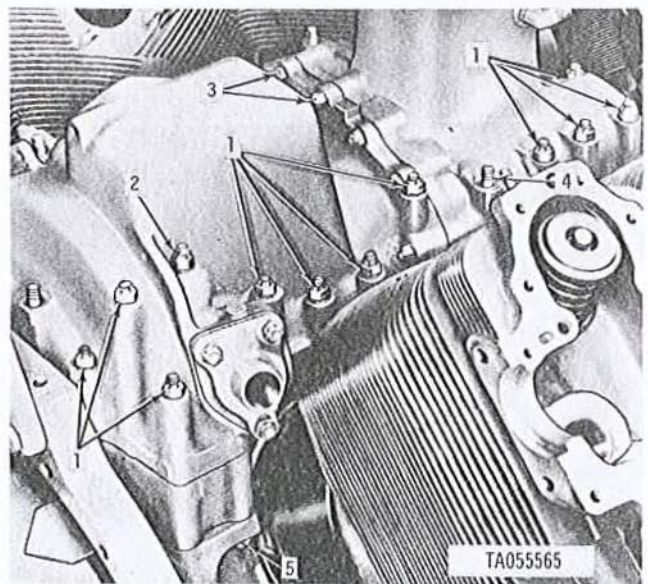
Removing or installing attaching parts for rear fan and accessory drive housing assemblies — right side.
